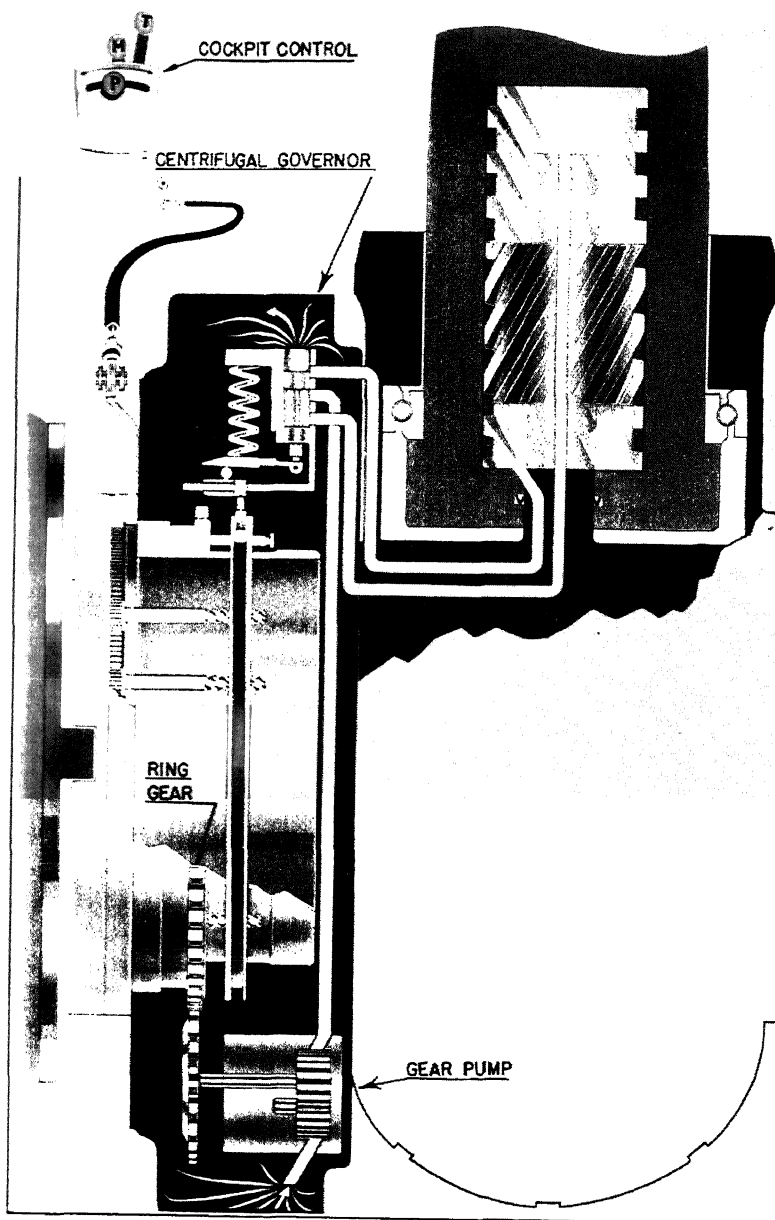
Aeroproducts schematic assembly drawing. (Courtesy Aeroproducts Division, General Motors Corp.)
